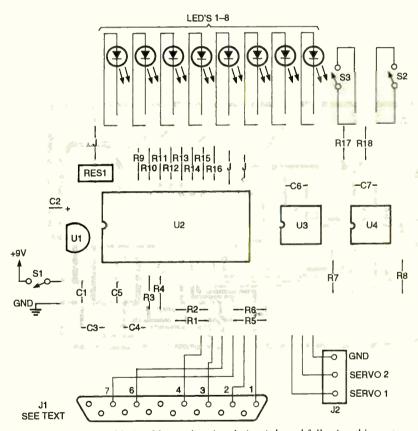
Assemble the Motion Memory's printed-circuit board following this parts-placement diagram. It is recommended that sockets be provided for U2–U4. Don't forget to pay close attention to the orientation of the polarized components.
